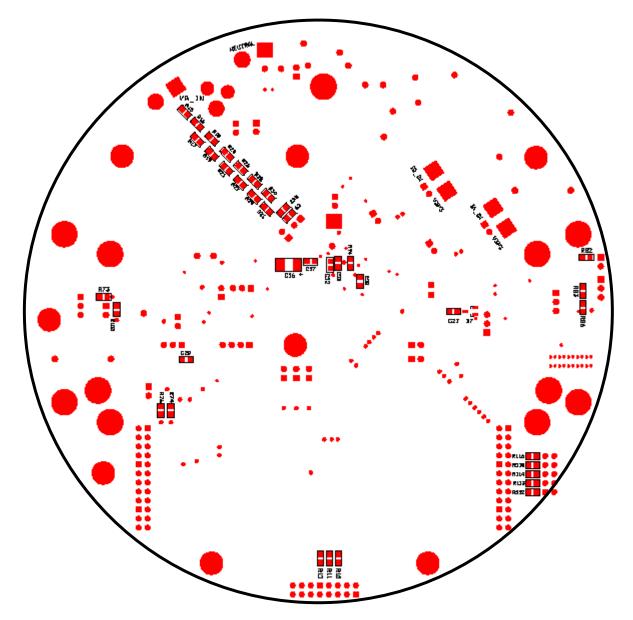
71M6511 4-Layer Demo Board: Bottom View
